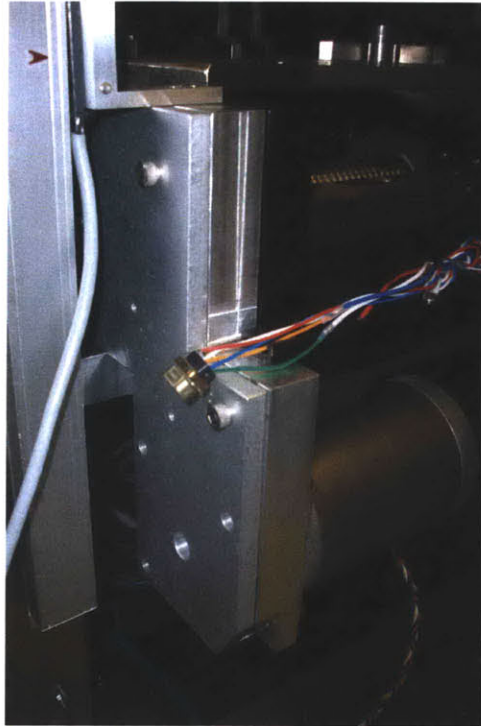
Plate on a vertical motion mechanism that houses the two circular gears that jammed.
